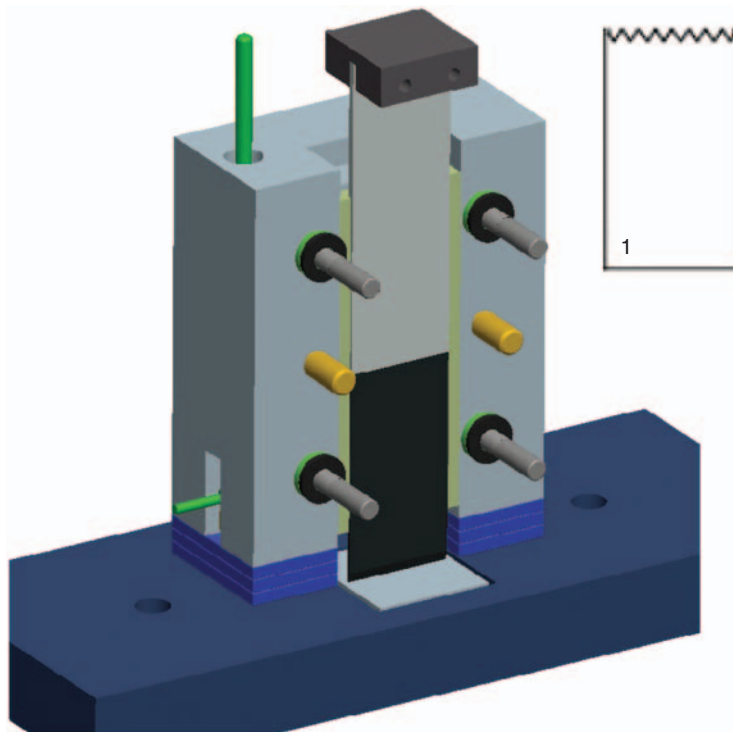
Test fixture and specimen (with saw-tooth trigger) developed in [16].
